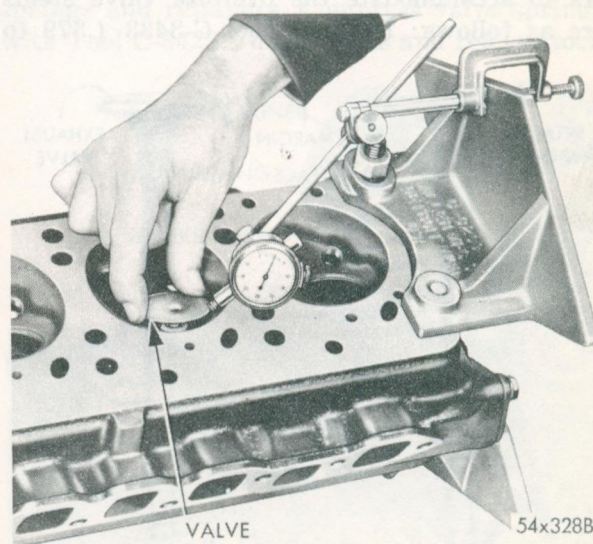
Checking Valve Guide Clearance (SpitFire) (Typical of FirePower)
